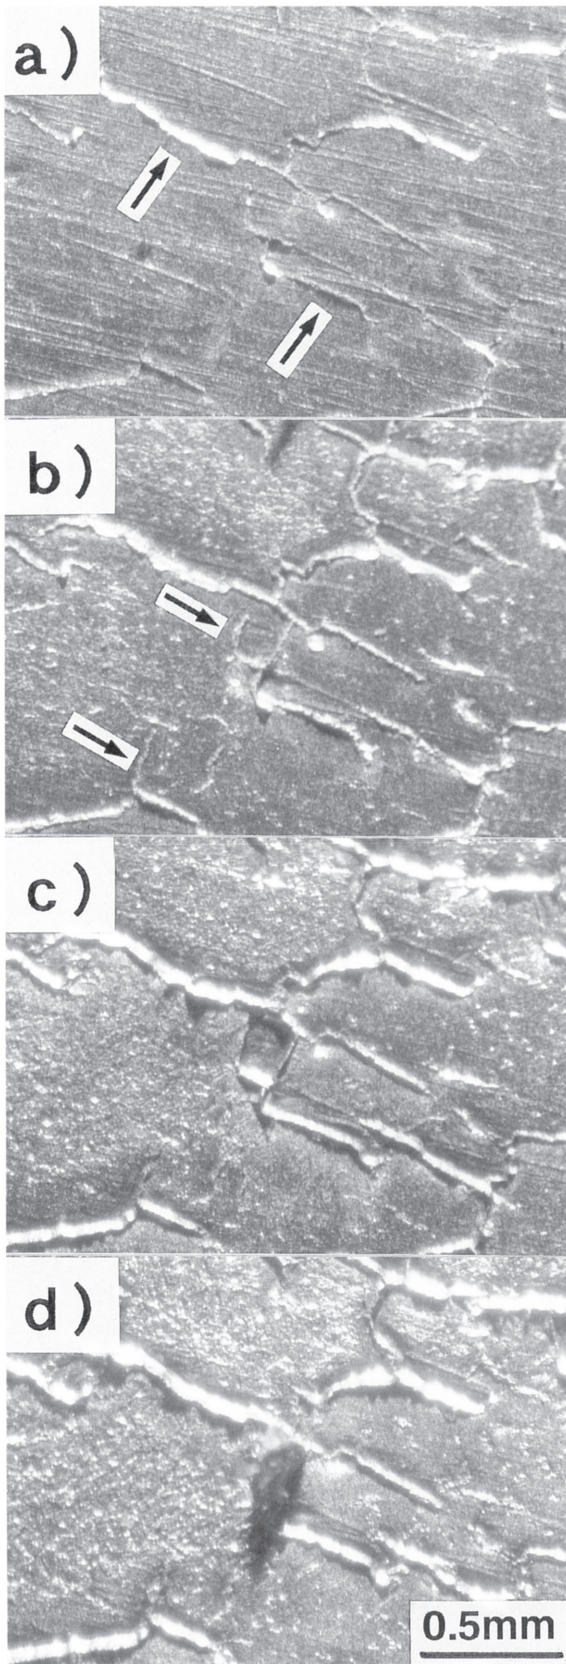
Photographs of heat checking printed on the cast products showing primary and secondary heat checking and spalling.
